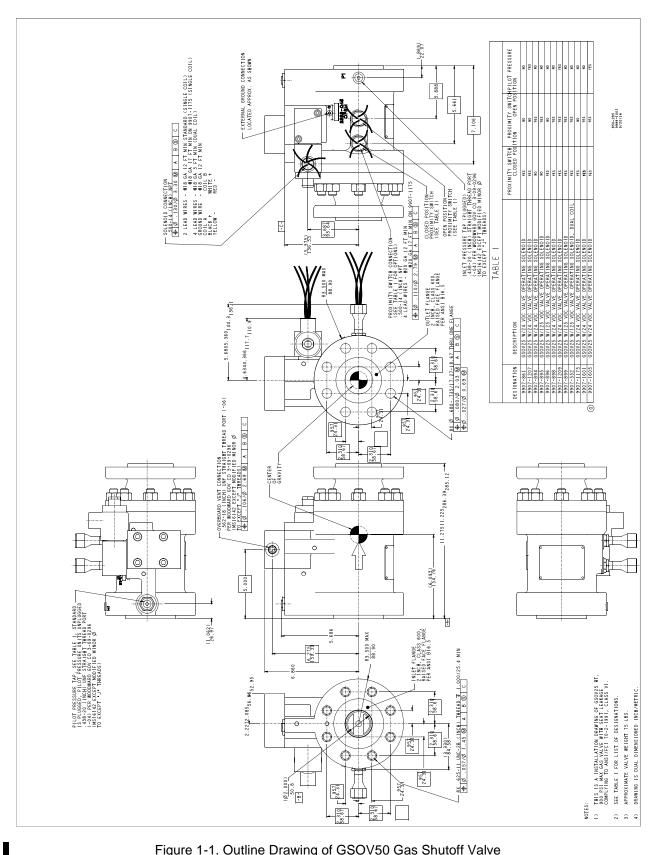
Outline Drawing of GSOV50 Gas Shutoff Valve
